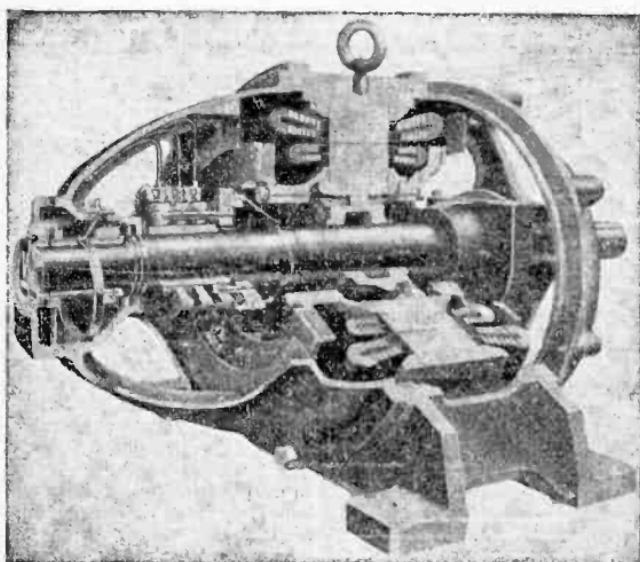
,794.—Westinghouse slip ring motor construction. Cut away view showing construction.
